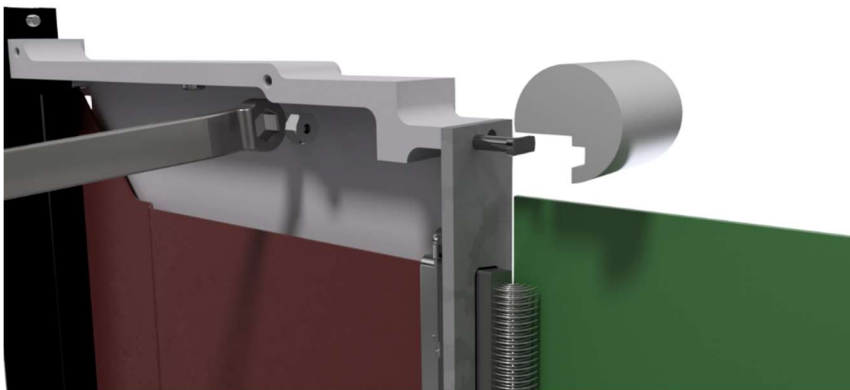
Use alignment tool to ensure that T bolt is correctly aligned
